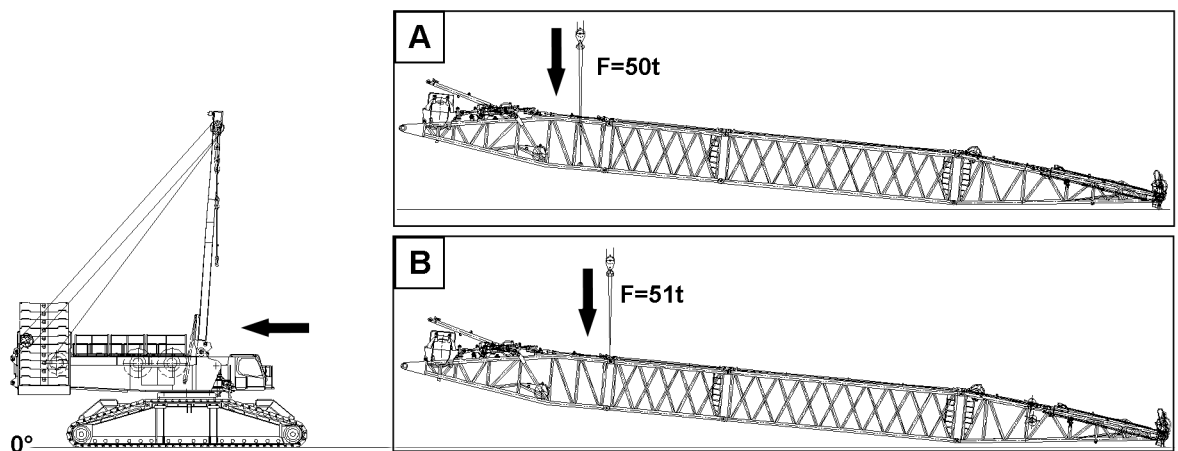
Fastening the D-boom with the auxiliary crane // Extending the crawler crane
